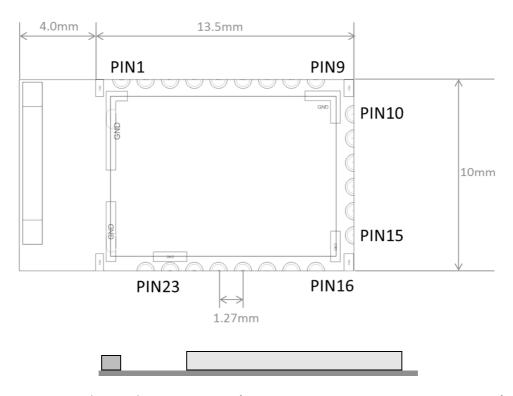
Physical Dimensions (W: 10.0mm, L: 17.5mm, T: 2.0mm)
